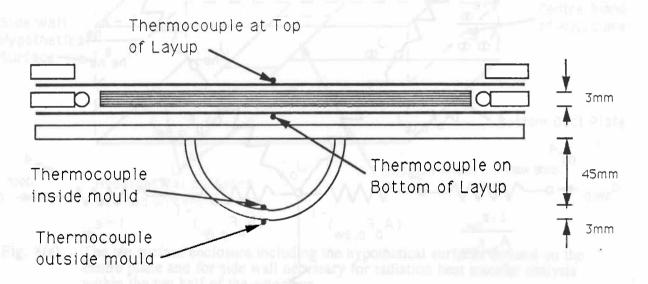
Exploded view showing position of thermocouples used to measure the temperature distribution through the mould and layup in the hemispherical mould.
